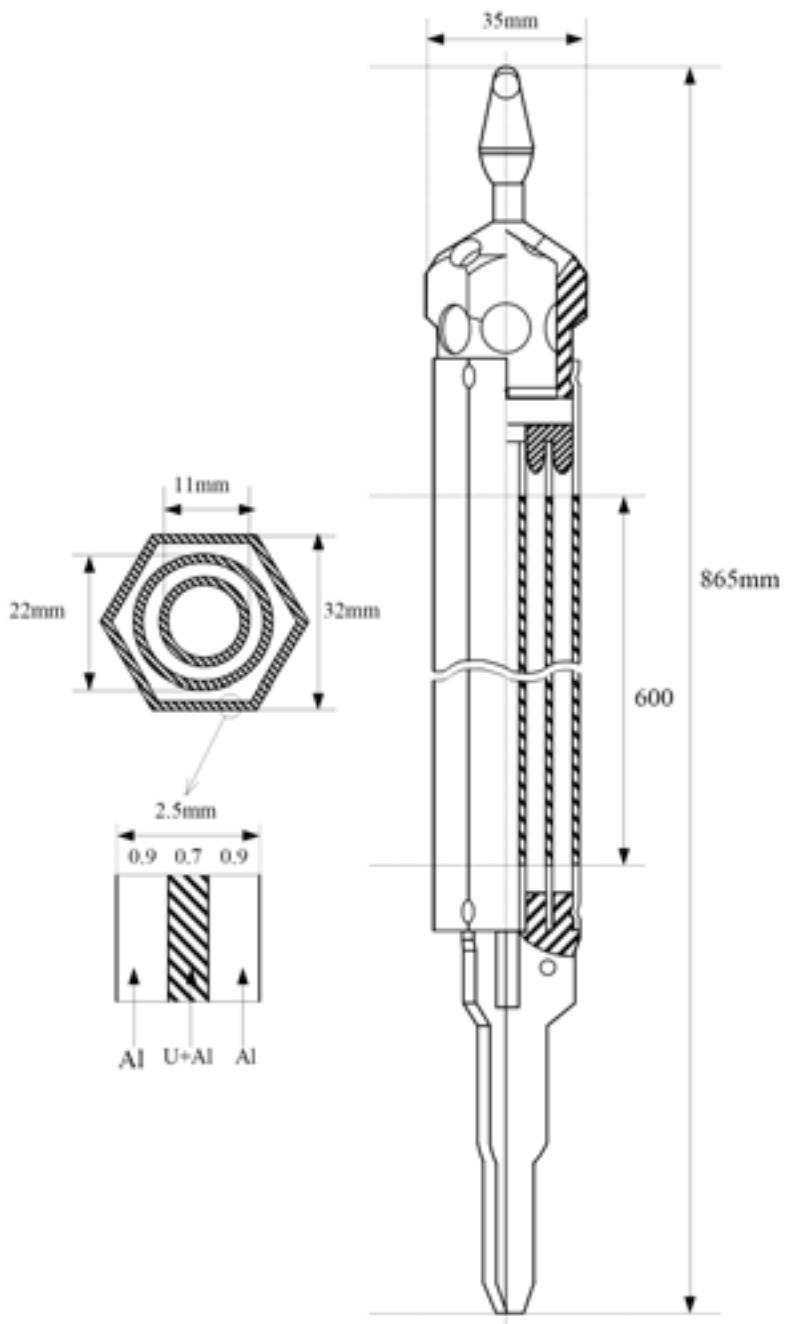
Fuel assembly type WWR-SM of the DNRR.
